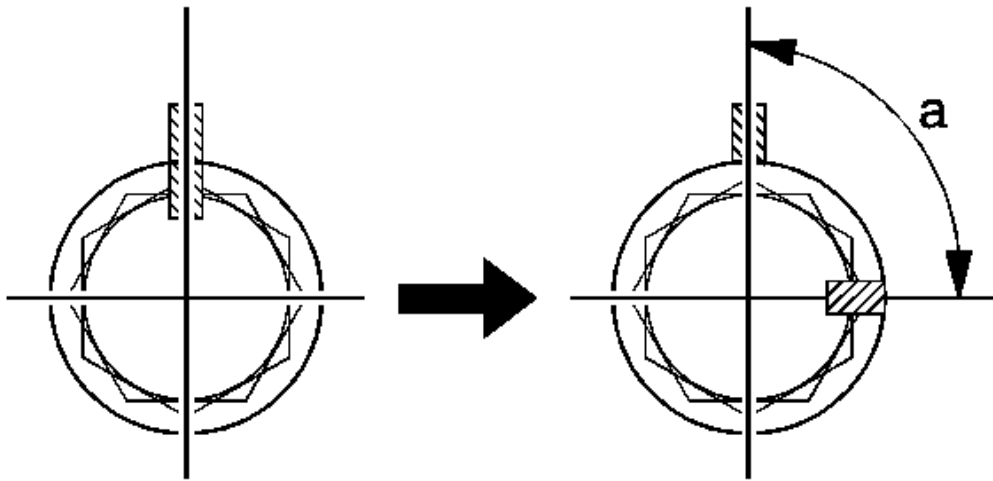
Identifying Flywheel/Flexplate Tightening Final Step
